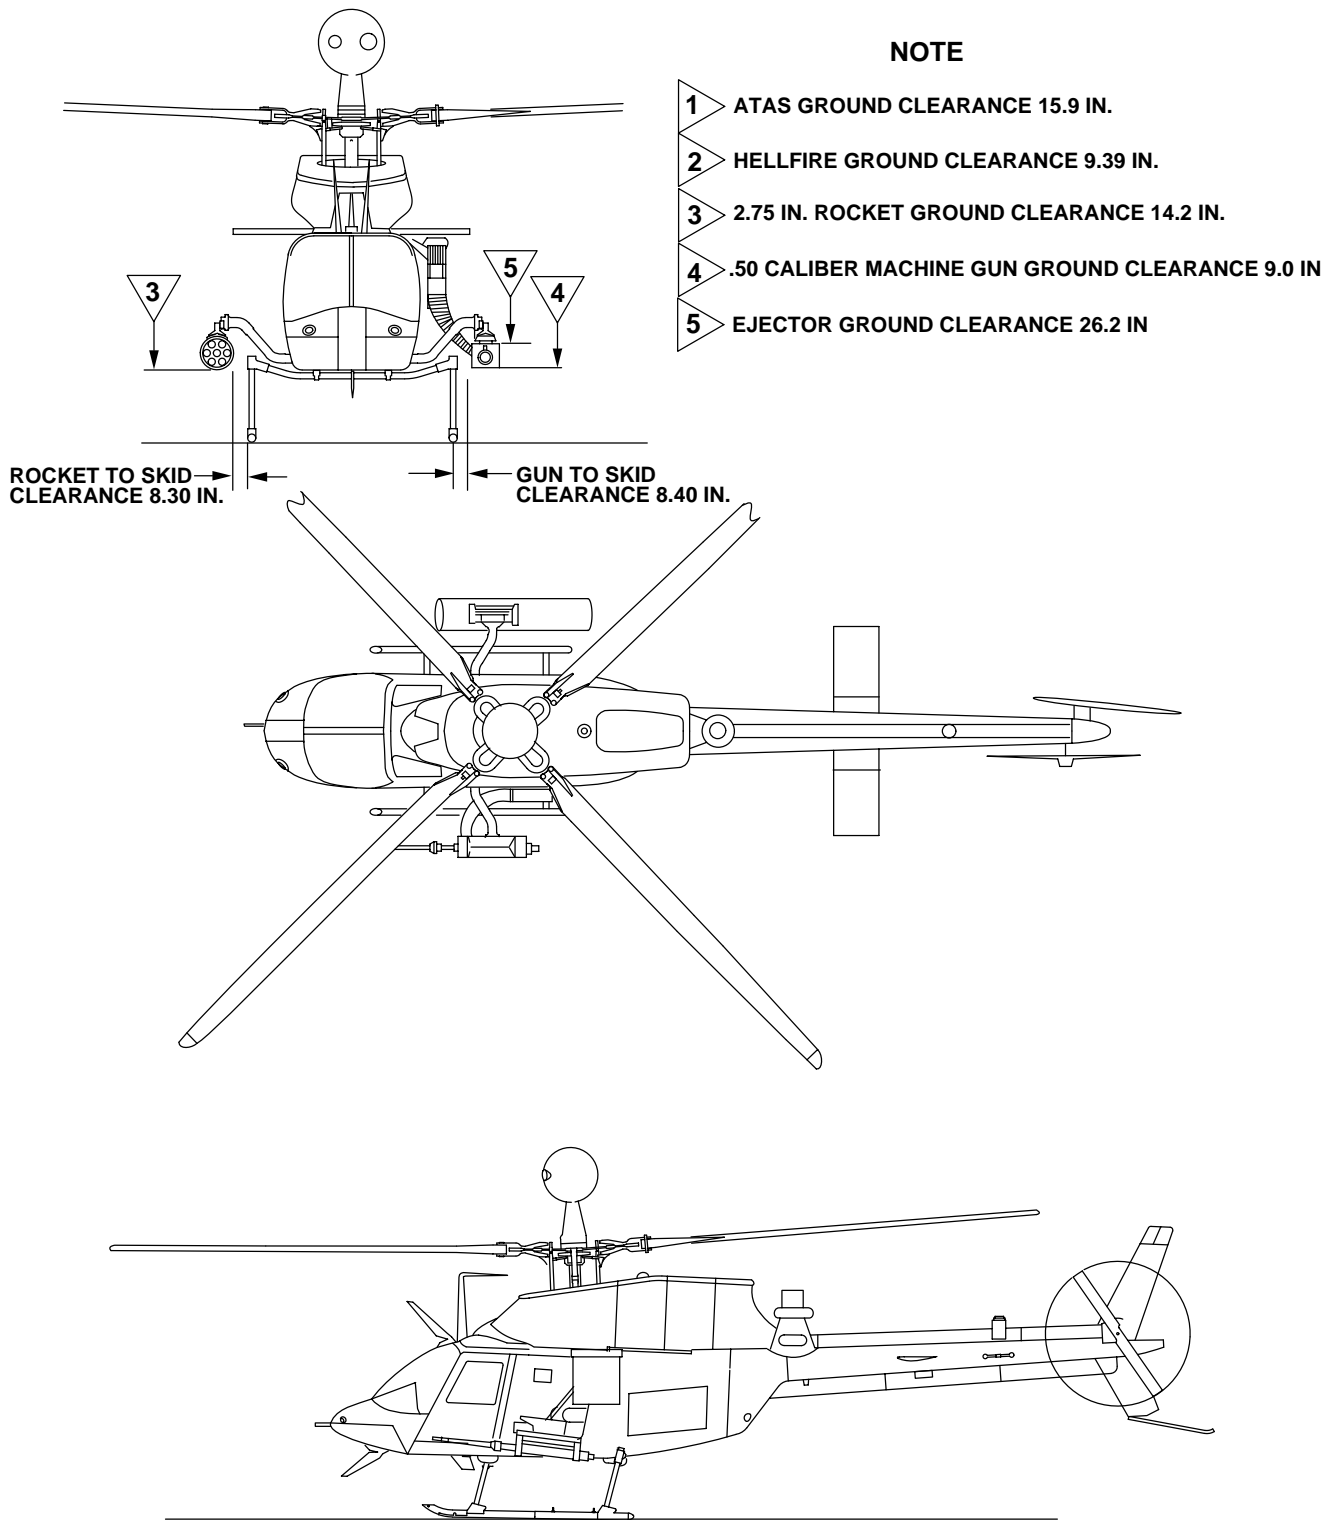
Principal Dimensions and Ground Clearance (Sheet 2 of 4)
